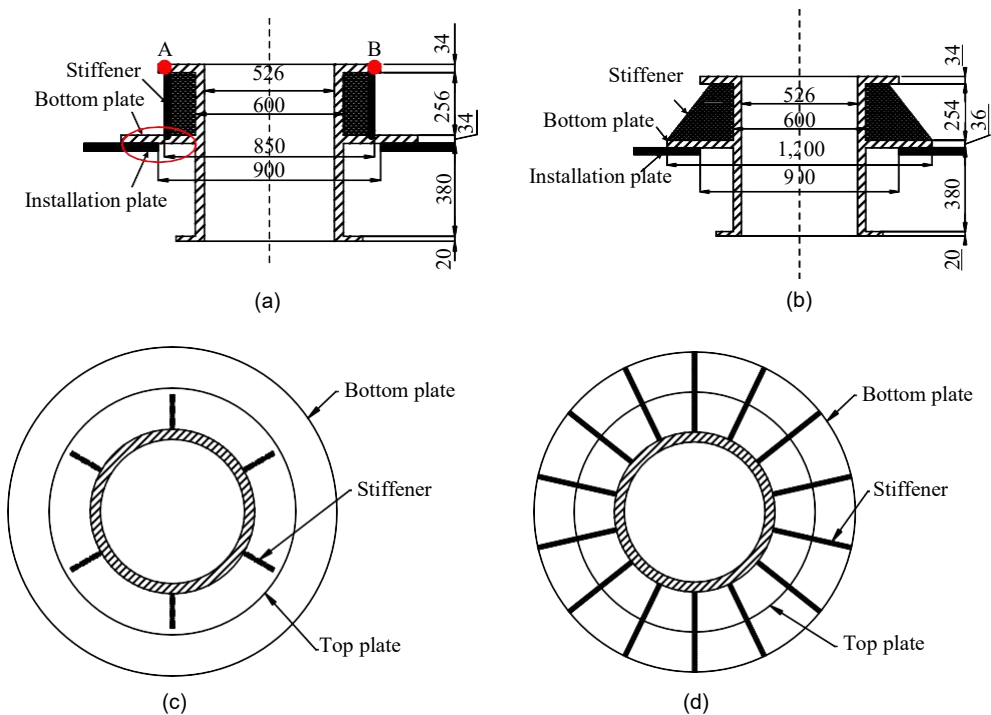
Sections of (a) Flange-O and (b) Flange-R (mm). Top views of (c) Flange-O and (d) Flange-R.
